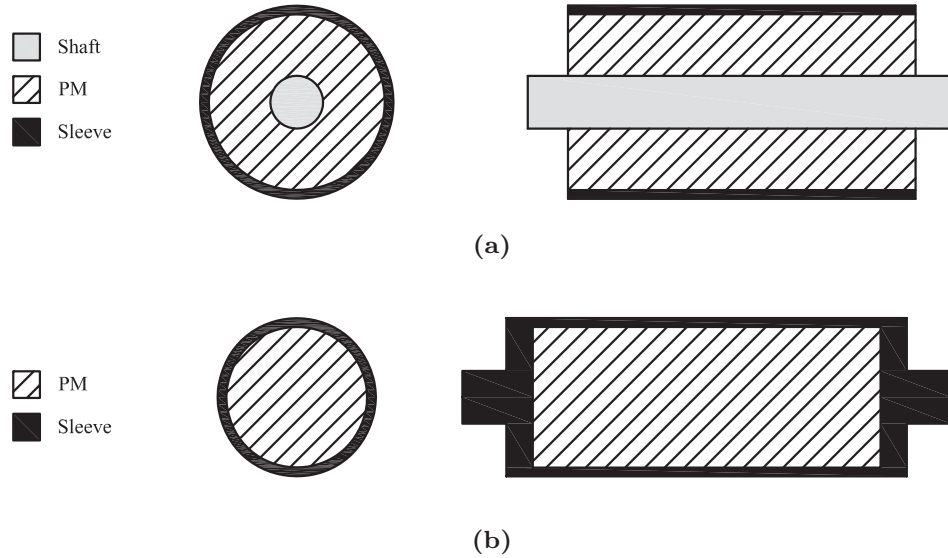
Typical rotor configurations of small-sized high-speed PM machines: a) with shaft and b) without shaft.
